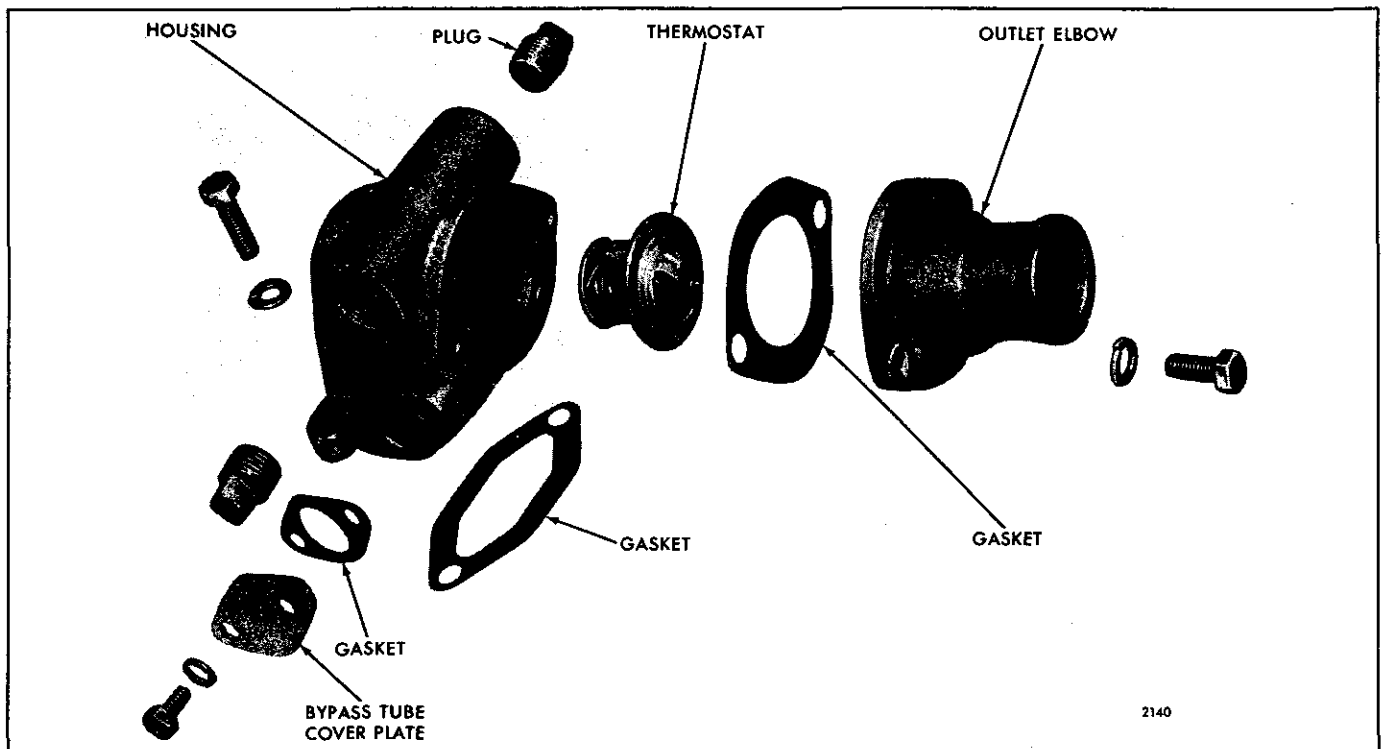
Thermostat Housing Details and Relative Location of Parts (In-Line Engine)
